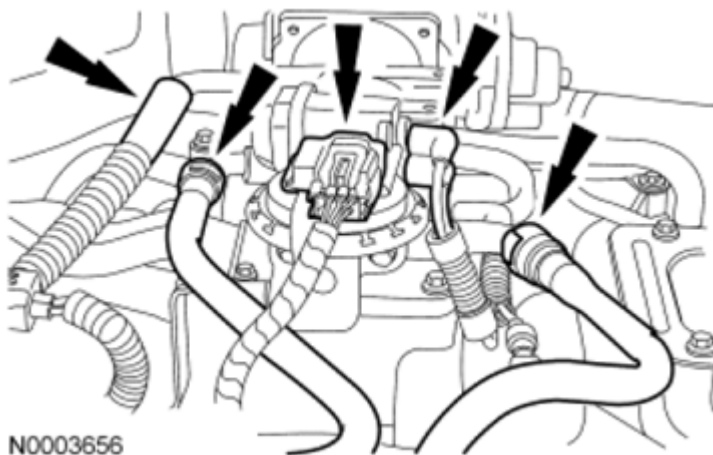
Locating Electrical Connector And Vacuum Hoses
